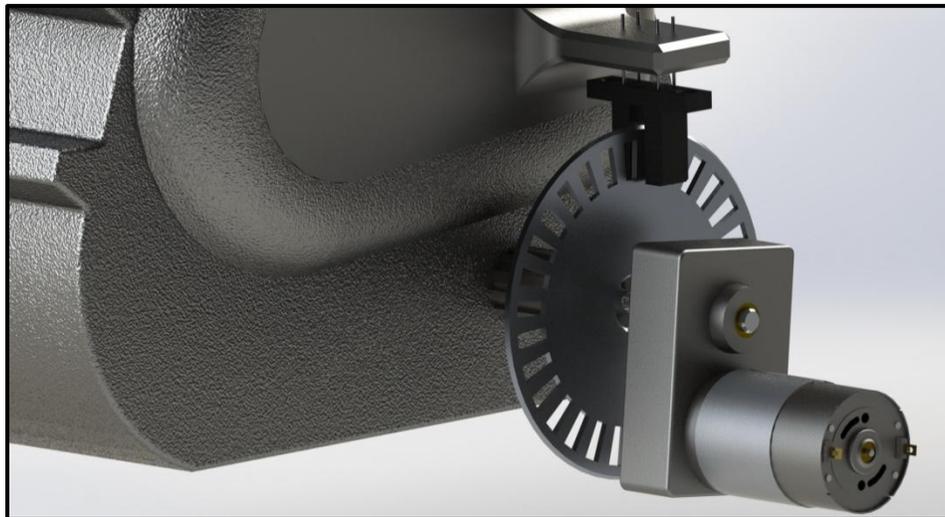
Actuating Mechanism assembled view (Solidworks 2014)
